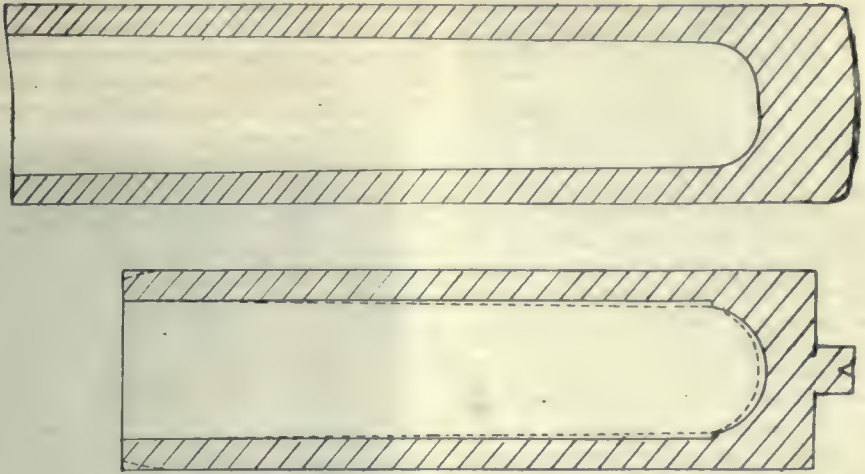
UPPER, ROUGH FORGING BEFORE MACHINING. LOWER, FORGING AFTER ROUGH MACHINING.
